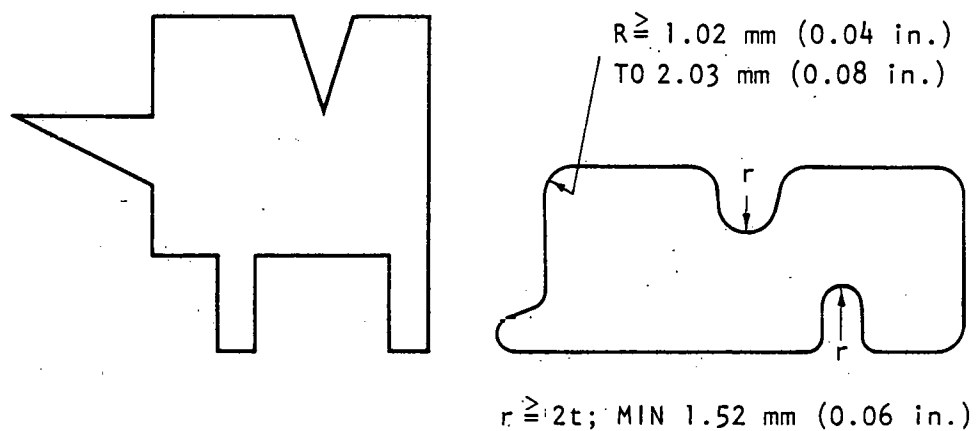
Utilize Large Radii on Blanked Parts⁵⁴
